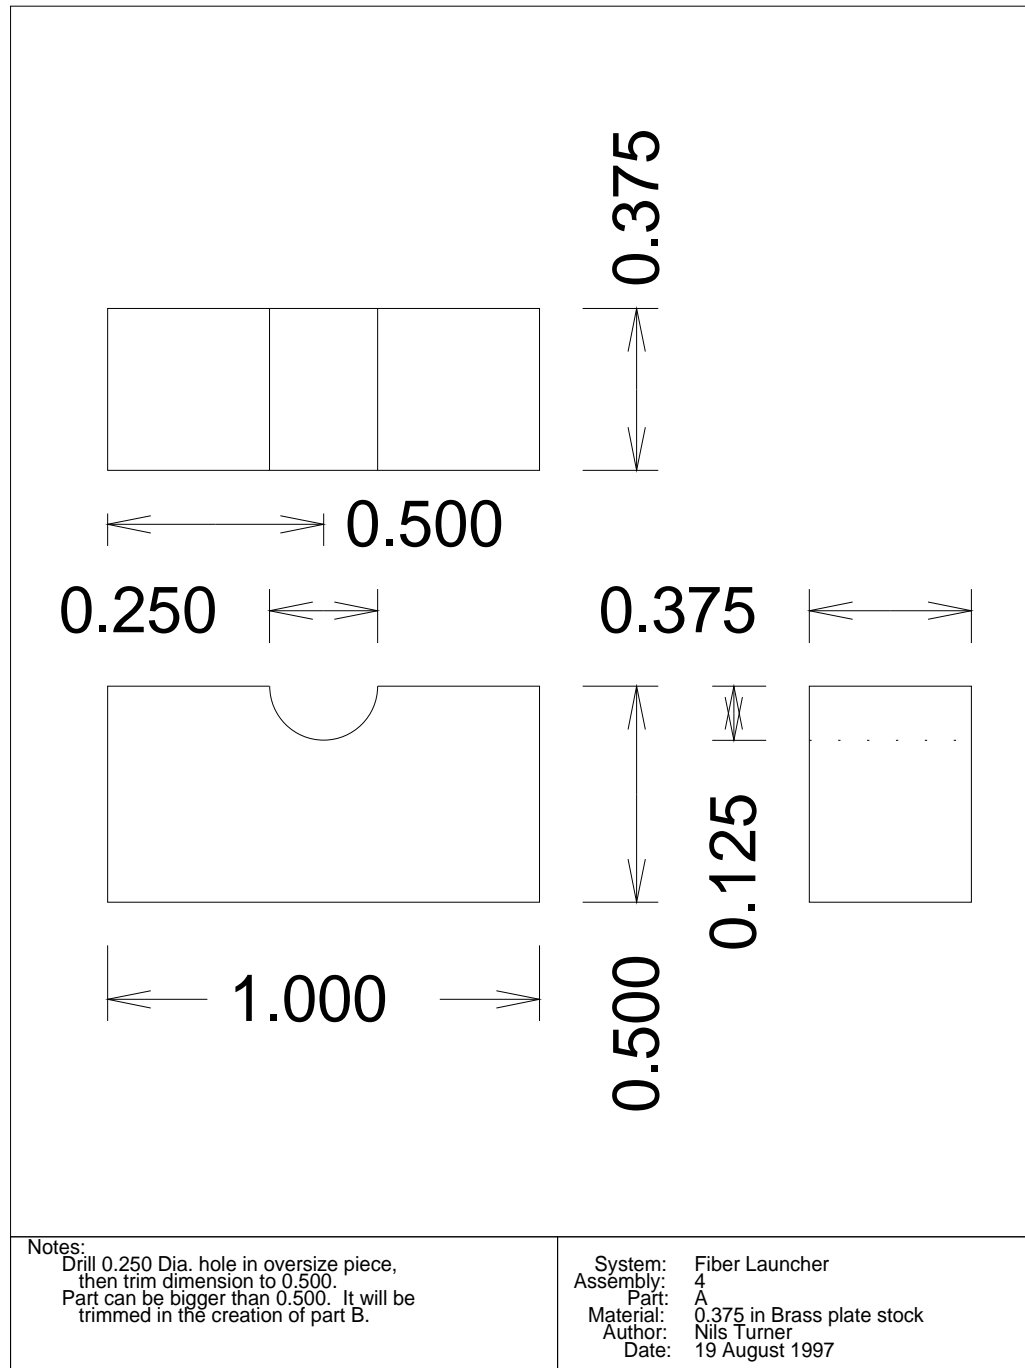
Fiber Launcher, Part 4A*. This part is a piece of the strand cable clamp. It gets brazed to *Part 4B*.
